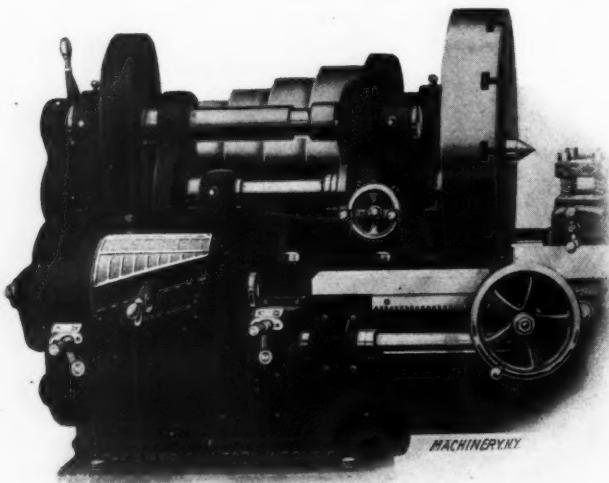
Detail View of American Lathe with Cone-pulley Drive
